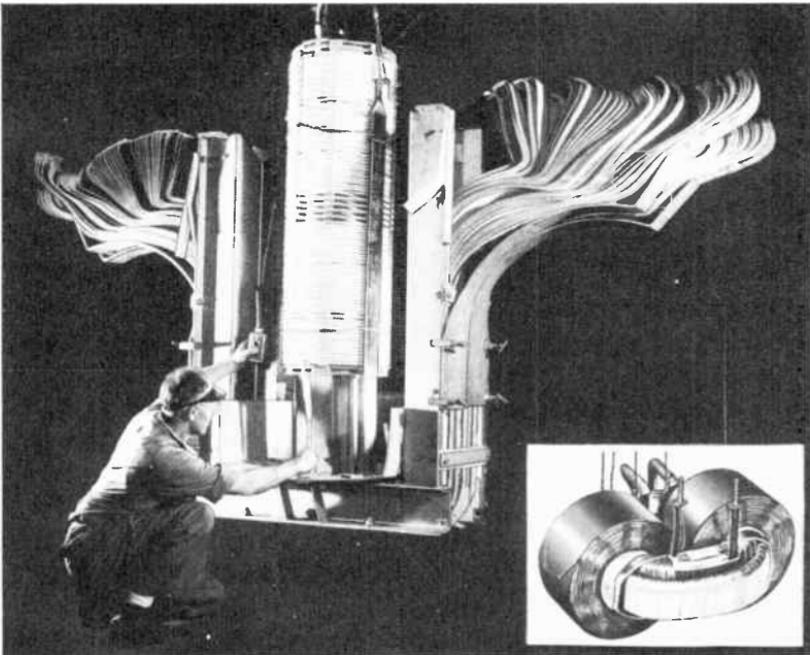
A power transformer being assembled from a precut, preformed core of laminated steel strips. A small Spirakore transformer is shown in the insert.
